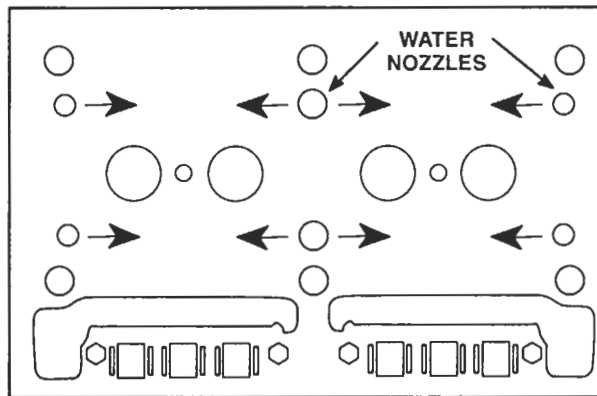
Correct Installation of Water Nozzles in Two-Valve Cylinder Head
